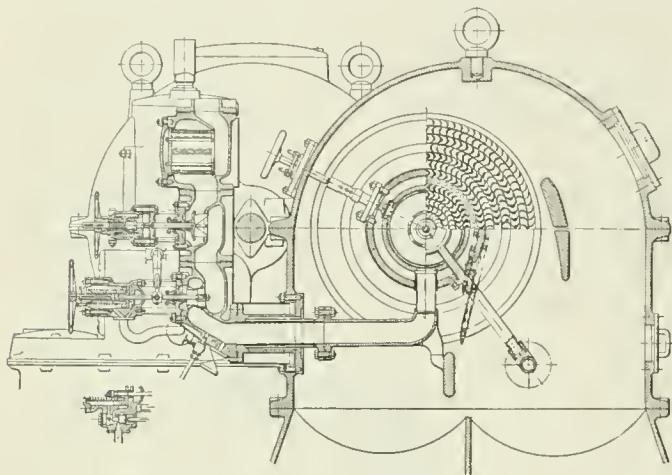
GENERAL ARRANGEMENT OF THE LJUNGSTRÖM EPICYCLIC REVERSING GEAR FOR MARINE TURBINES
